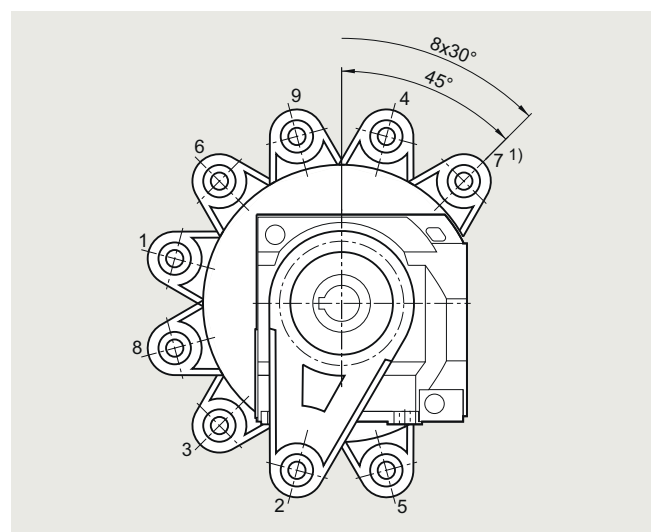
/11 Helical worm gearboxes CAD, Figure 2, sizes 39A to 89
